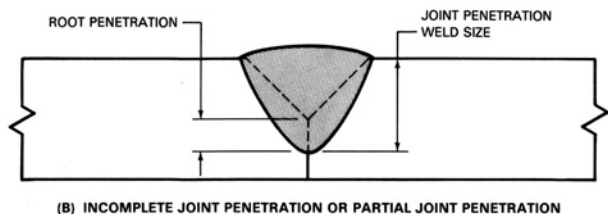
V-Groove butt joint with partial joint penetration and terms.
